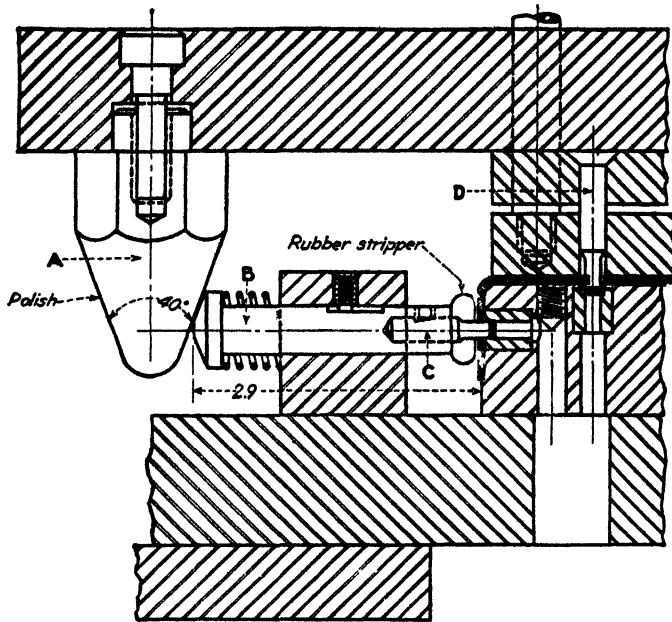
Button dies are used for piercing on contours. A rubber stripper assists the spring.
